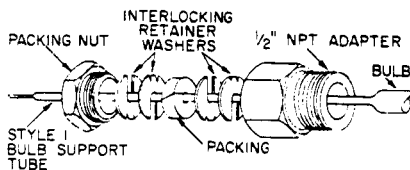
Part No. FTG13A-600R packing nut assembly. (Used with swaged bulb with support tube for direct immersion application.)
